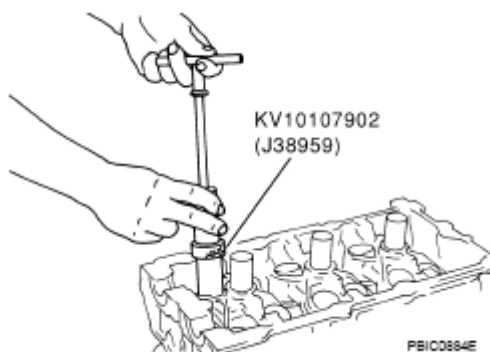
Removing Valve Oil Seal Using Valve Oil Seal Puller
